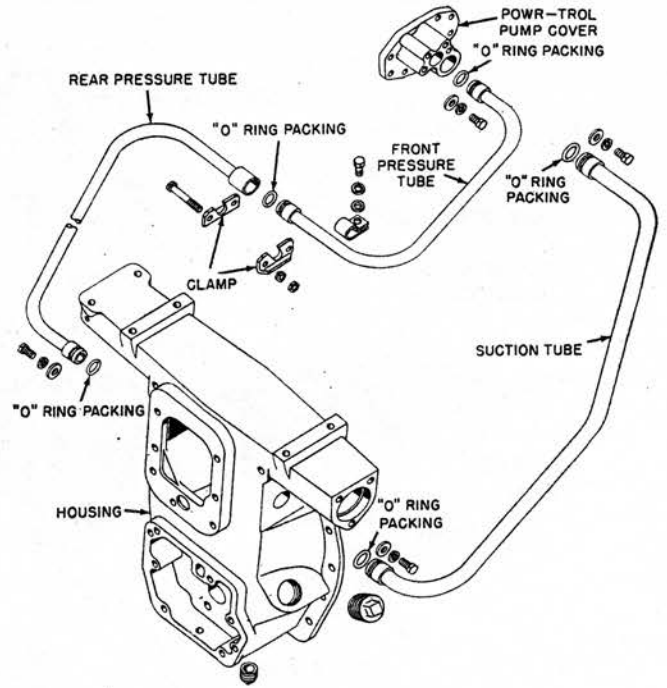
B Exploded view of Powr-Trol oil tubes and rockshaft housing. Models 50, 60
